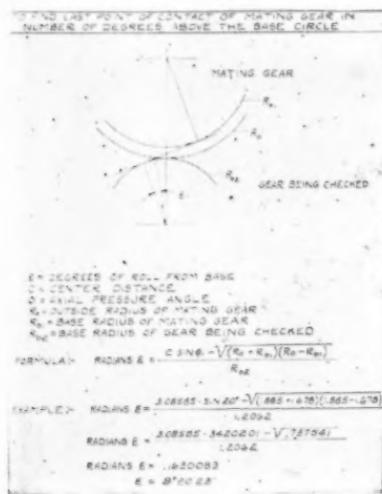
Formula and method for finding last point of contact of mating gear in number of degrees above the base circle.
